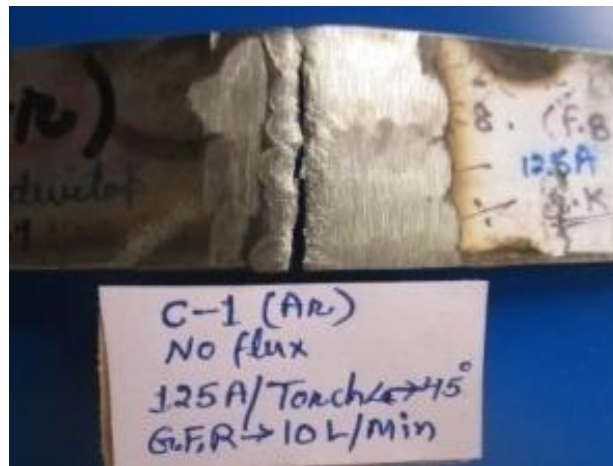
Appearance of crack in the weld bead (Sample-1 of Ar shielding) after bending shows poor ductility
